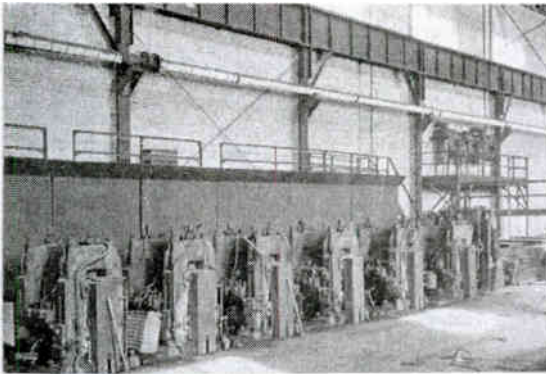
18 in. Blooming Mill Operated by 6000 H.P. Induction Motor
